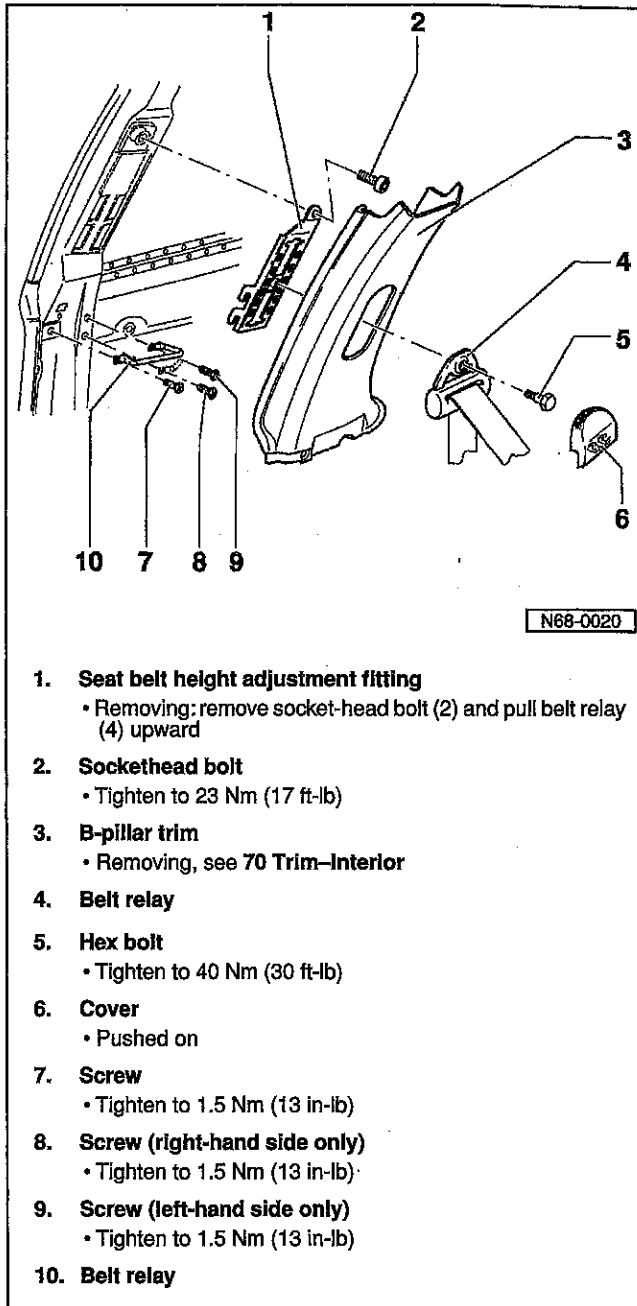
Exploded view of seat belt height adjustment for Cabrio only.
